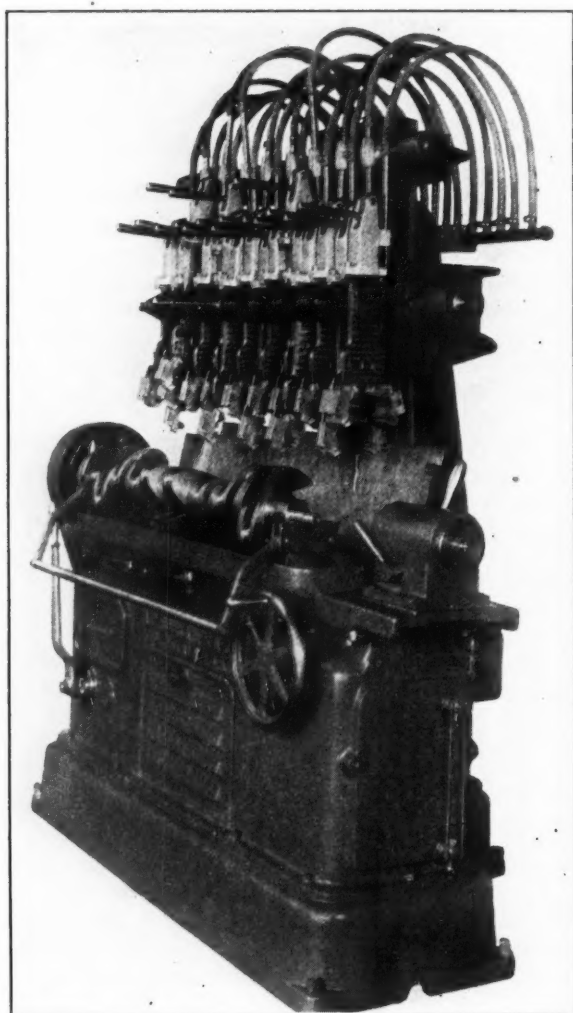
Schraner crankshaft lapping machine, showing loading device in out position and all lapping heads secured in correct position for quick application to shaft
